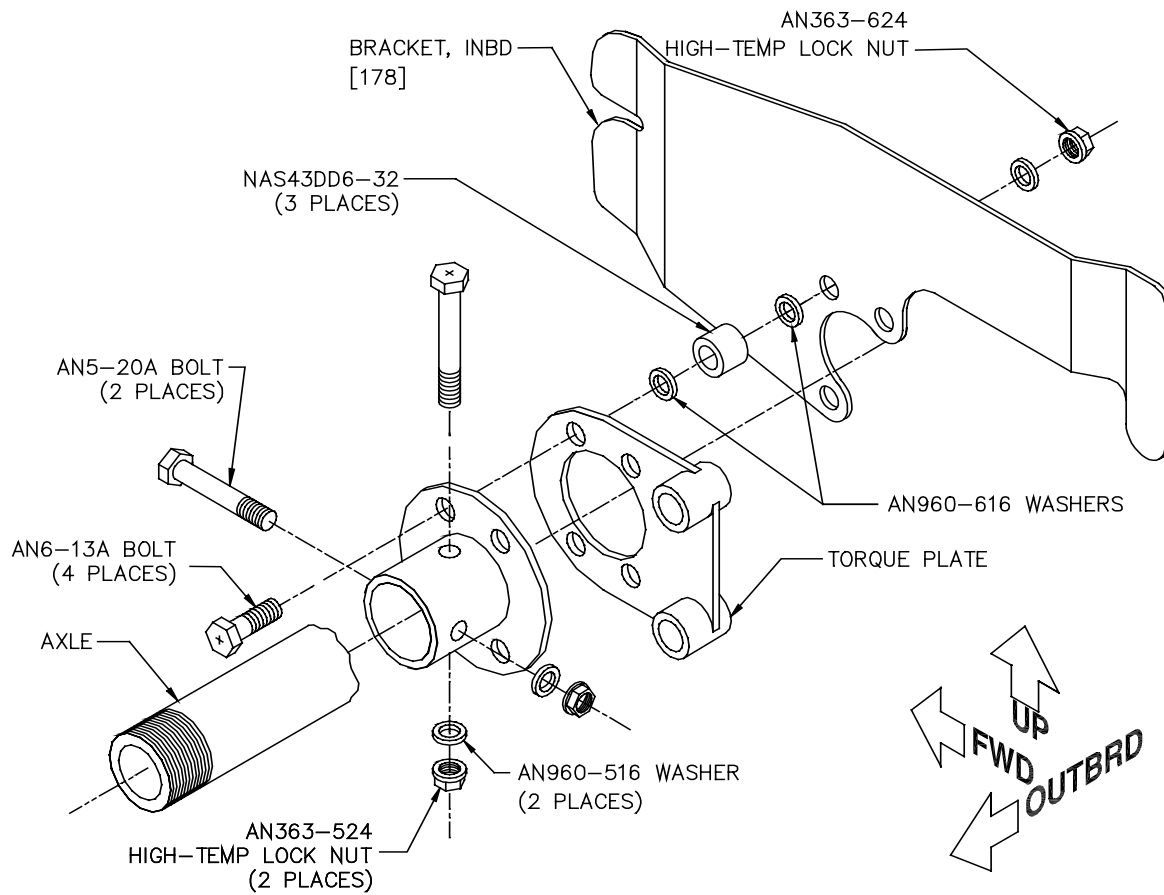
Installing the Brake Torque Plate With Wheel Pants
